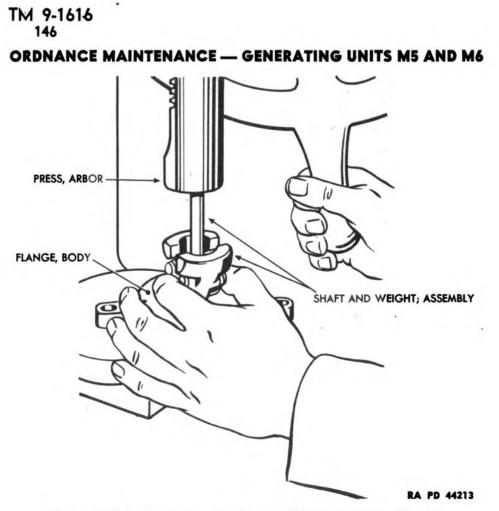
Pressing Shaft and Weight Assembly into Governor Drive Shaft Bearing
